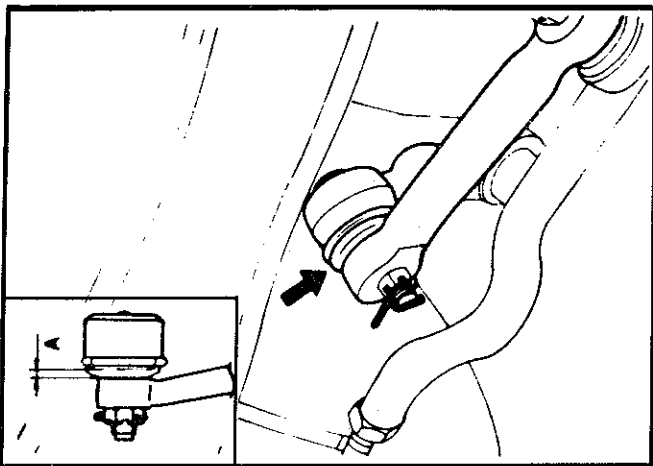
Checking relay rod-to-pitman arm clearance and relay rod-to-idler arm clearance
